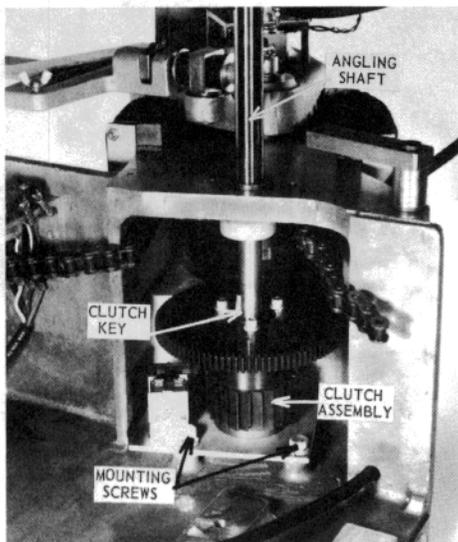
Angling Clutch Assembly, Key, and Mounting Screws and Angling Shaft
